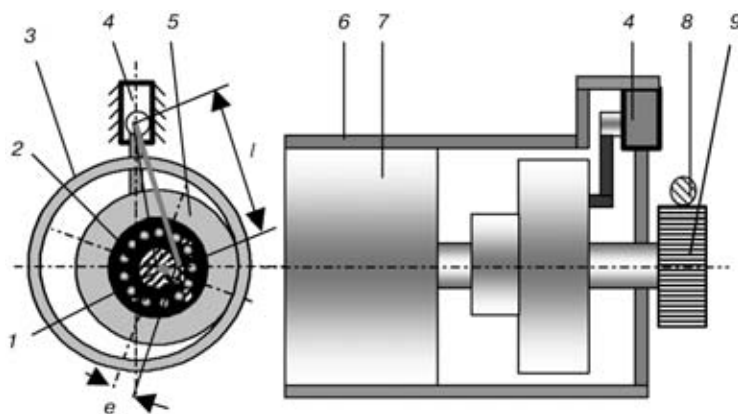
Schematic representation of the mechanism of electrode wire pulsed feed with QWC: 1 — eccentric shaft; 2 — bearing; 3 — gear with internal toothing; 4 — motion pulse former; 5 — gear with external toothing; 6 — case; 7 — drive electric motor; 8 — electrode wire; 9 — feed roller
